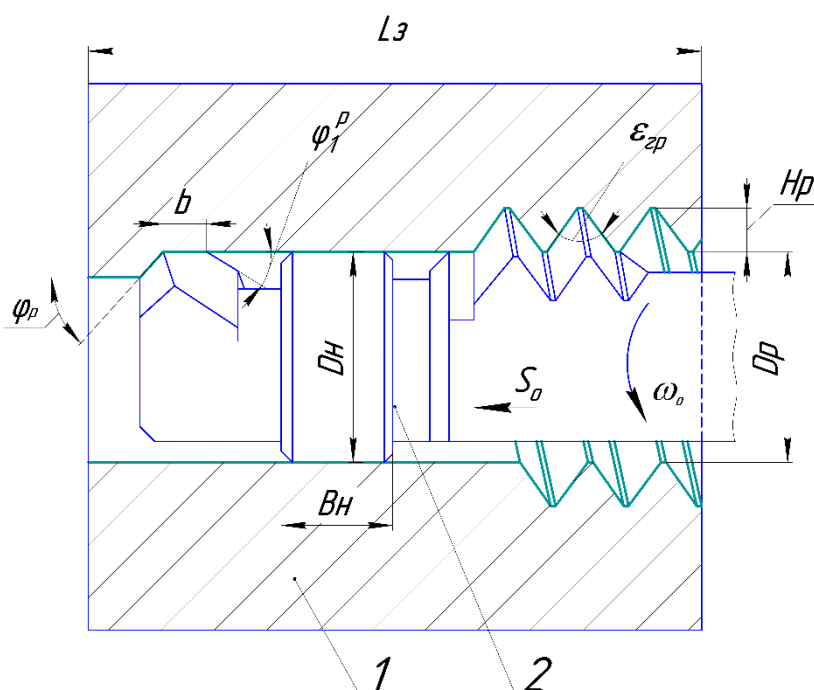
Chart of internal threading with a combined tool with a comb cutter with a guide
